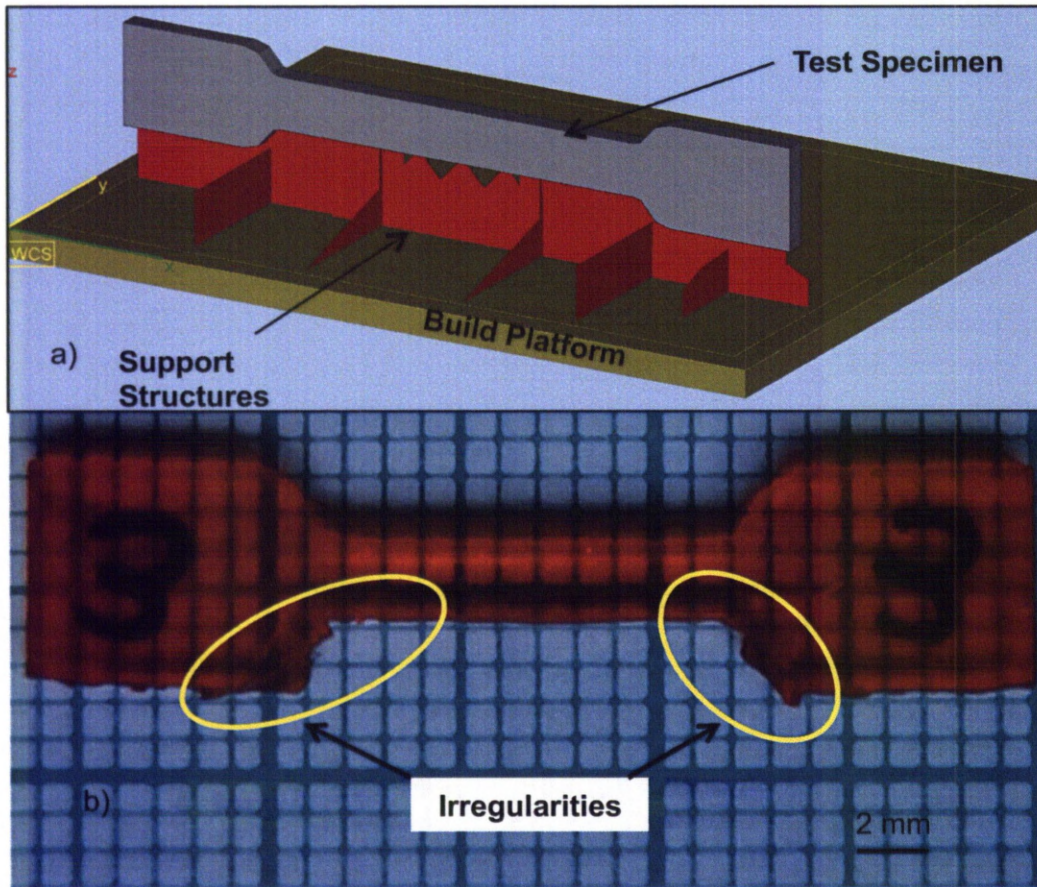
(a) View of Supports Generated for Tensile Specimen and, (b) Irregularities Surface Formed After Removal of Supports
